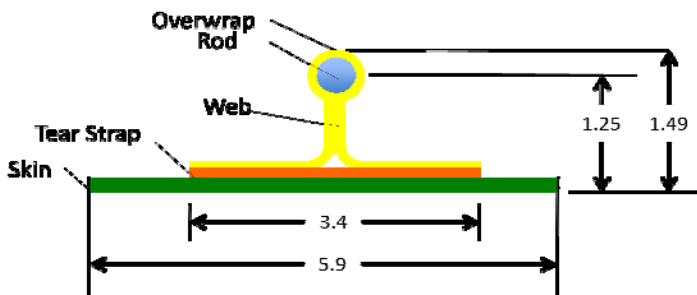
Specimen cross sectional geometry. Dimensions are in inches.
